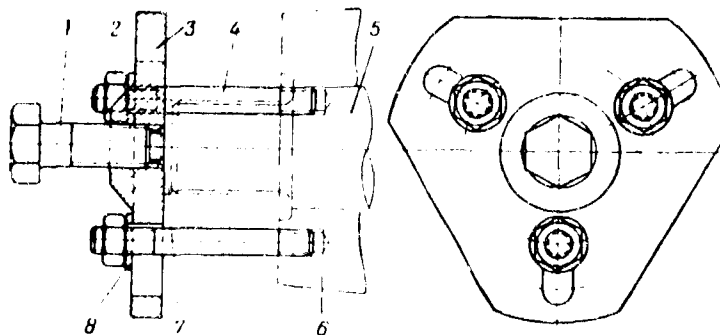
Removal of Propeller Screw with Strip and Pressure Bolt: 1 - pressure bolt; 2 - nut; 3 - support strip (flange); 4 - pin; 5 - propeller shaft; 6 - propeller hub; 7 - steel lining; and 8 - washer.
